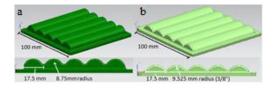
Cylindrical lens arrays (a) test part a; (b) test part b.
